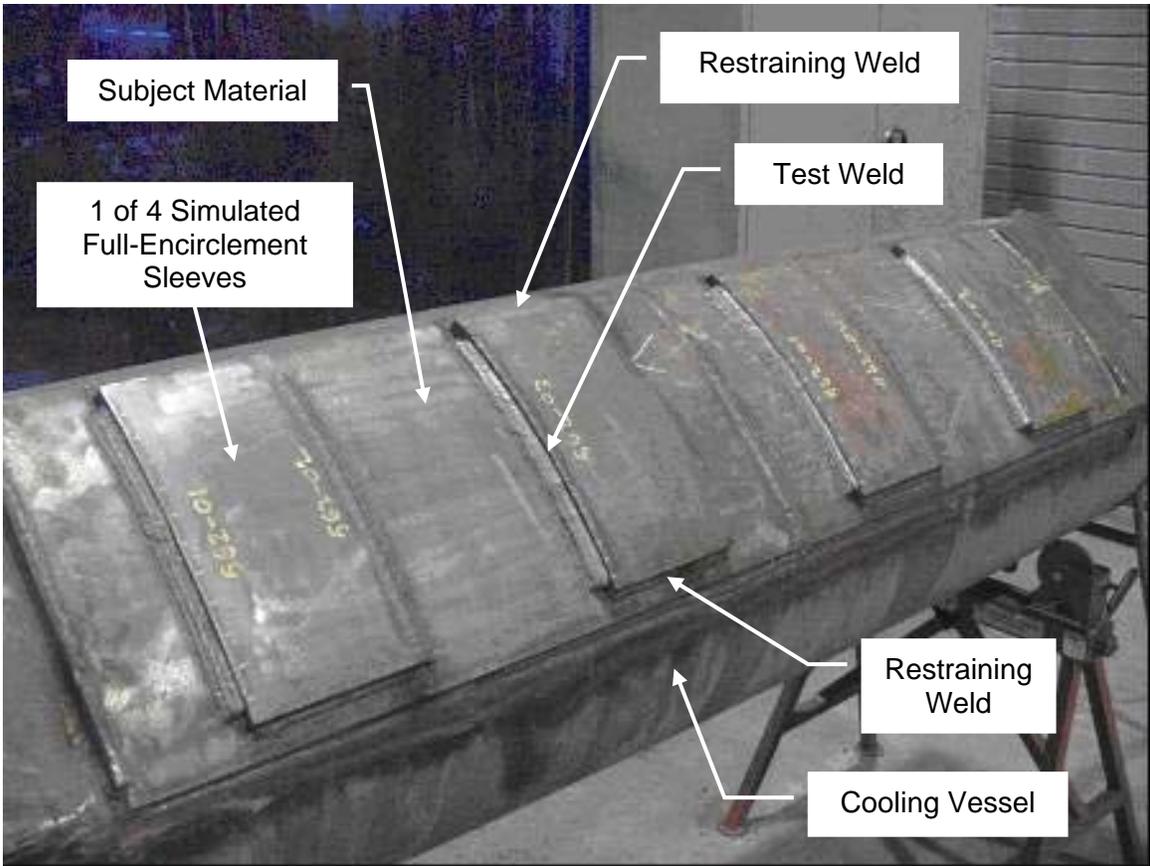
Test Fixture for In-Service Weld Procedure Development
